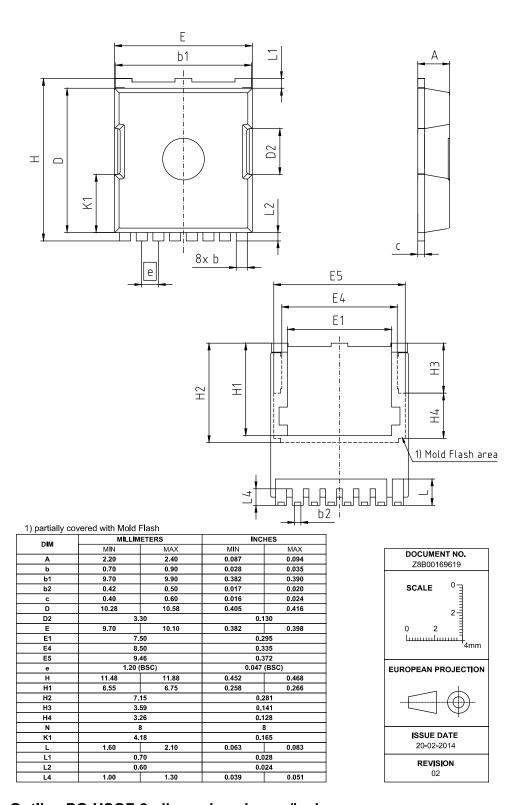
Outline PG-HSOF-8, dimensions in mm/inches
